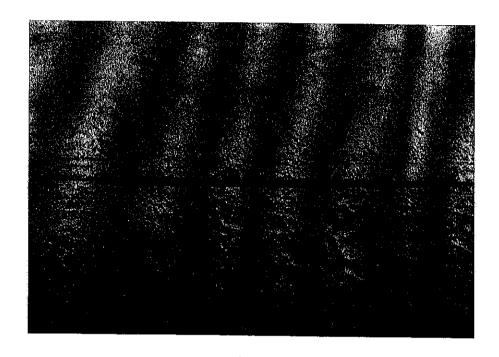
(a): Weld attack galvanised pipe (outside). Magnification: X0,6.
